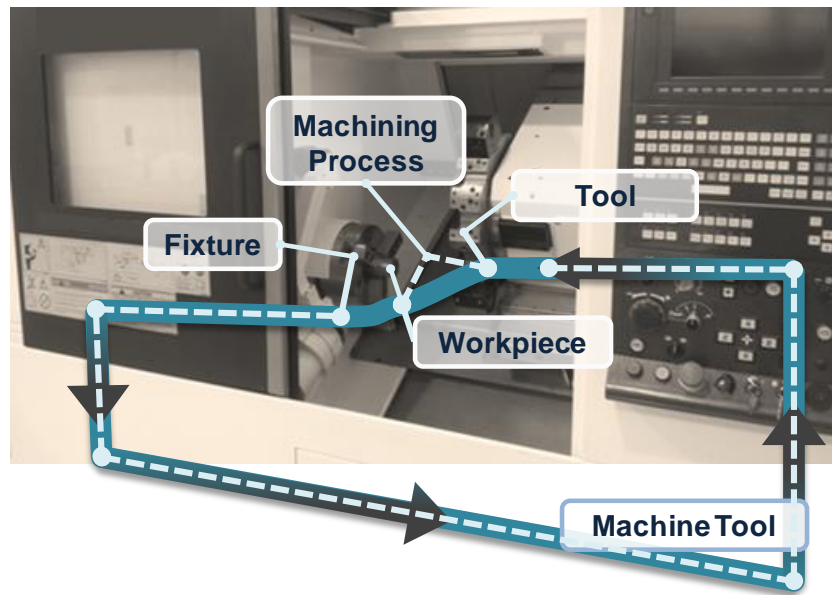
Machine tool kinematic chain (Open Loop System)
